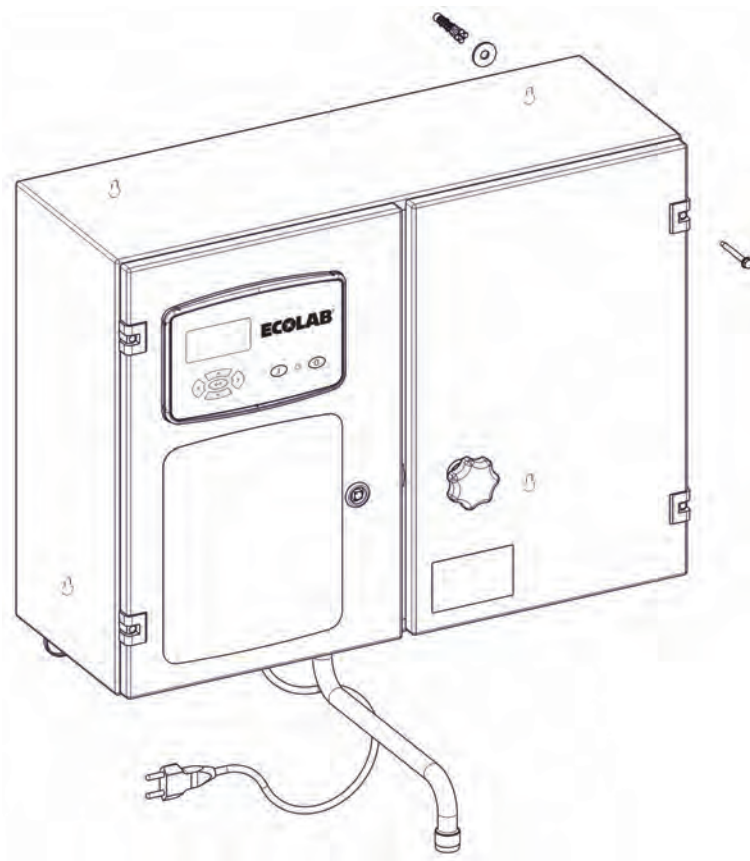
Wall mounting of the DG 3 with 2 doors
